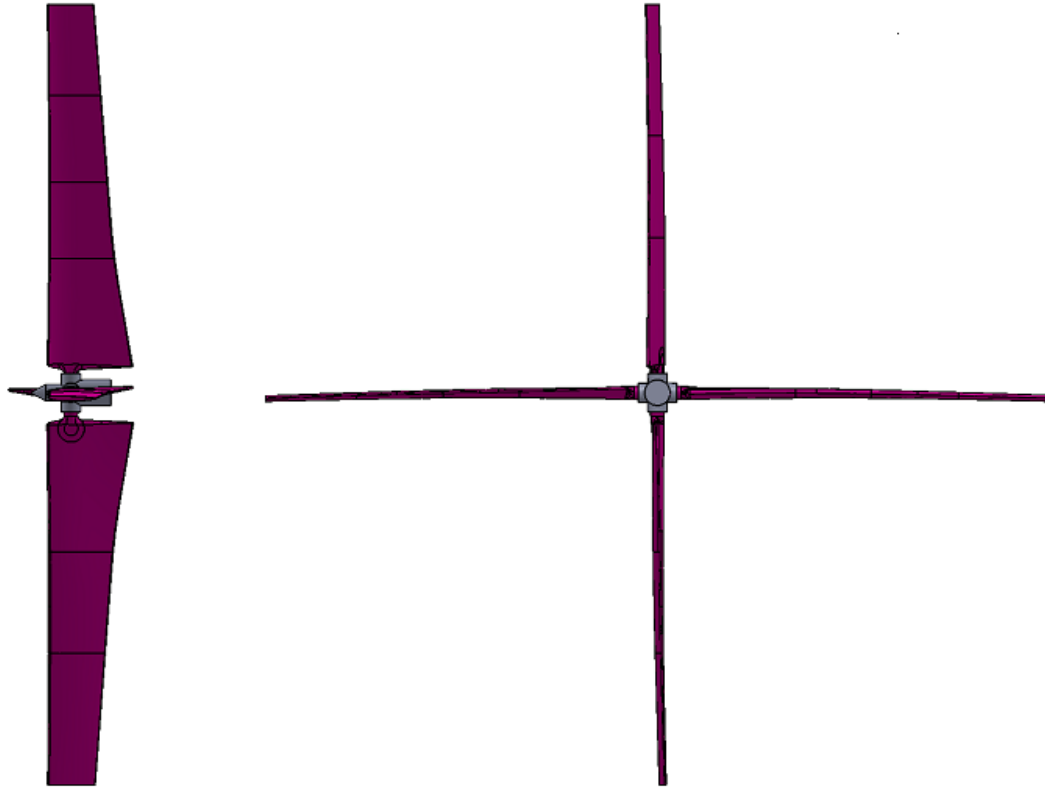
Typical Four Bladed Fan assembly (Actual dimension can be collected from Mr. Sharad Saxena, Email: saxenas@iitk.ac.in)
